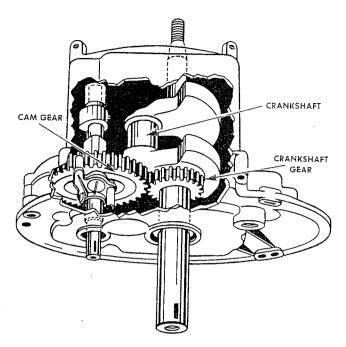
A gear on the crankshaft turns a gear on the camshaft. (Clinton Engines Corp.)
